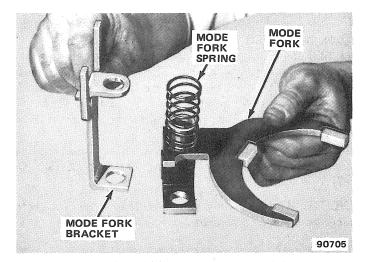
D-66 Assembling Mode Fork, Spring and Bracket
